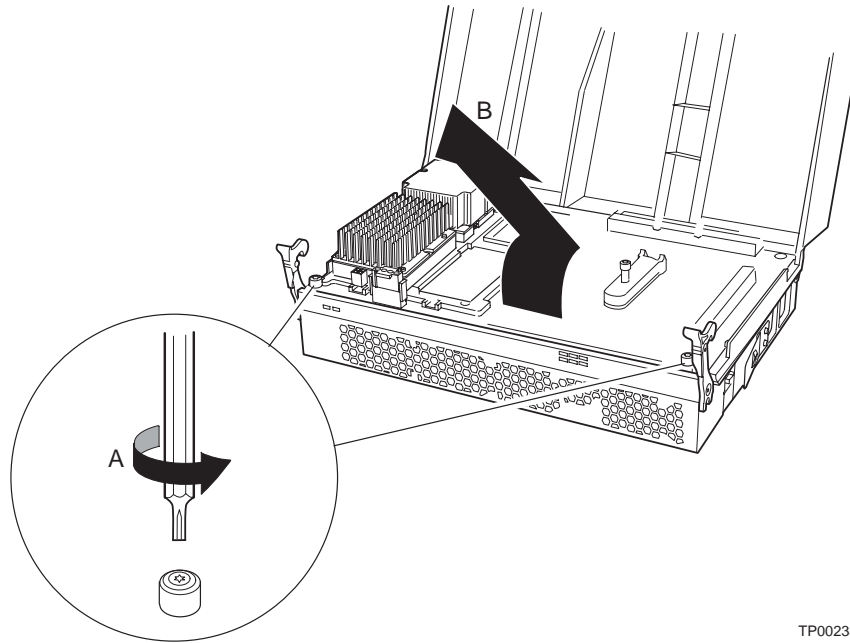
Installing a DC-to-DC Converter on the Processor Board (Primary Side)
